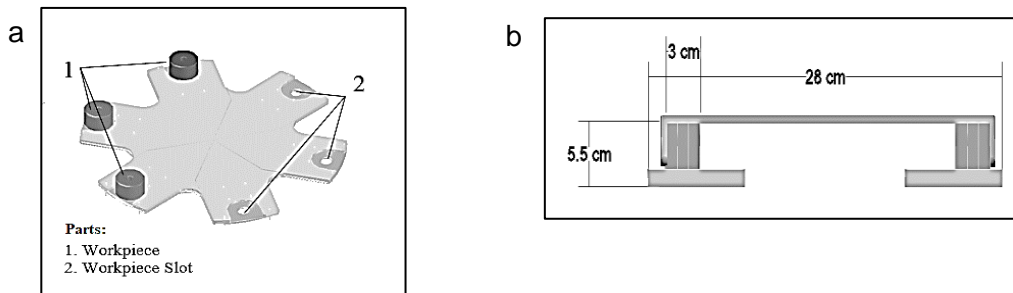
(a) Rotating Turret Table; (b) Table Base
